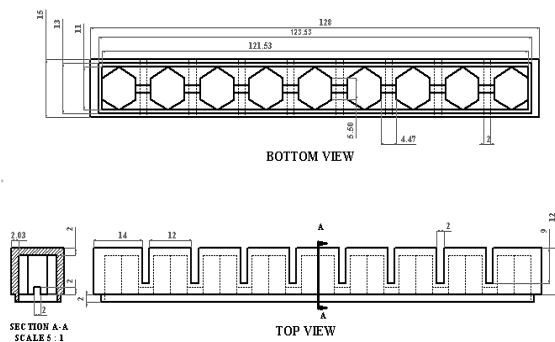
Geometrical dimensions of the CAD model of the main body of the actuator (Top and bottom view).
